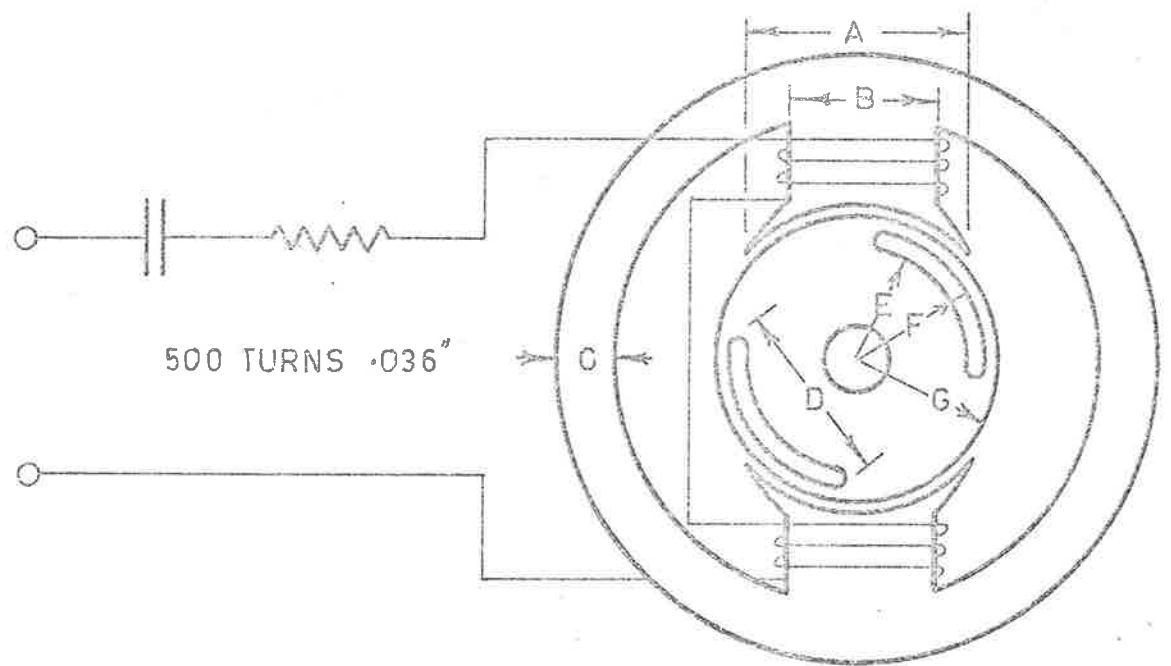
DETAILS OF PROTOTYPE MACHINE
